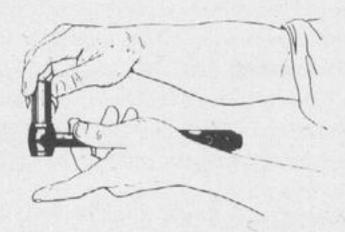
Checking Fit of Piston Pin in Connecting Rod Bushing
